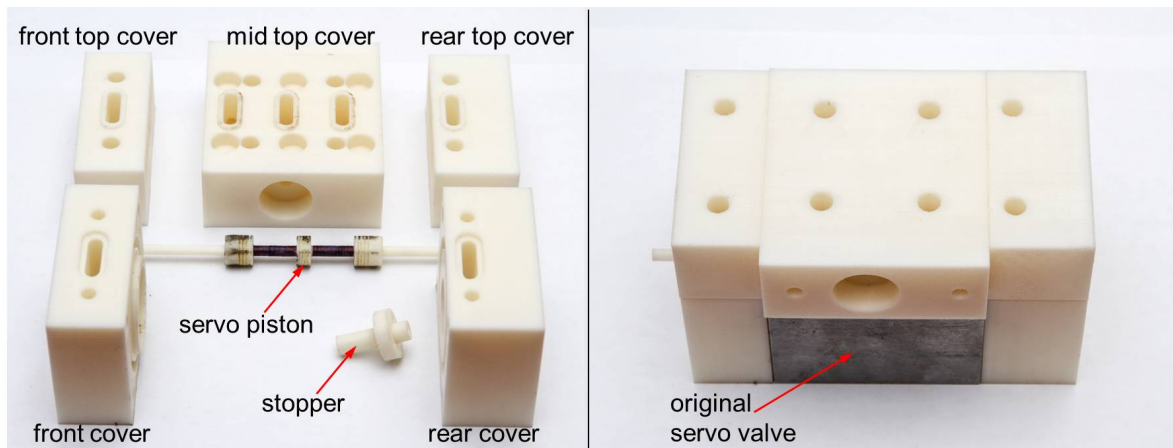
RP components of the servo valve (left); assembled parts (right)
